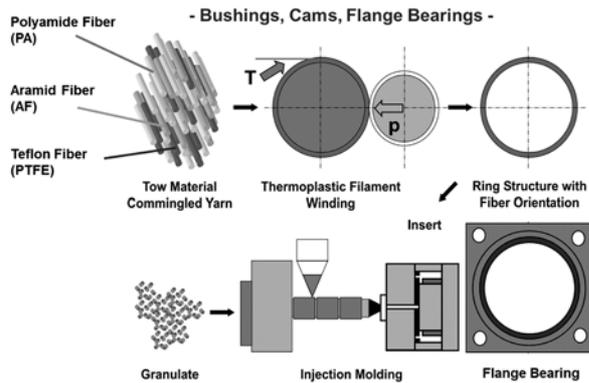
Principle processing steps for producing filament wound thermoplastic bushings or flange bearings
